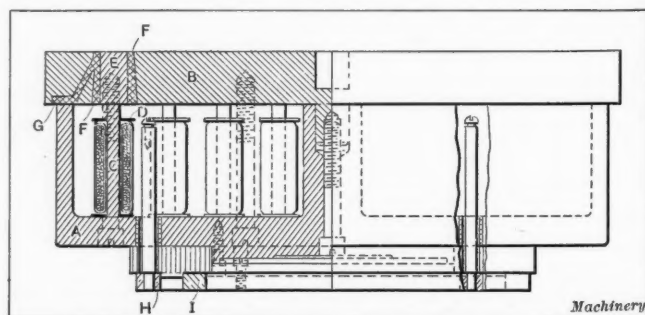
Cross-sectional View of Heald Rotary Magnetic Chuck
